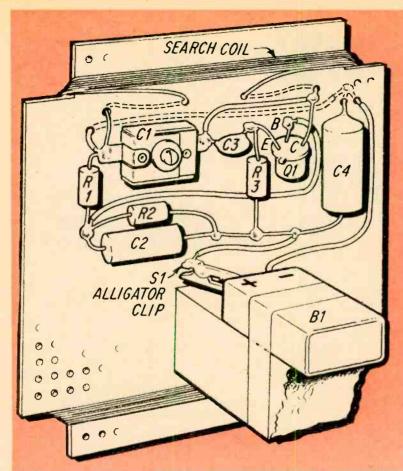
On our model, parts are held on board by weaving wires through holes. However, you could use flea clips. To turn on locator, we simply attach an alligator clip to positive battery terminai. Switch Sl. shown on schematic, would be connected between lead going to alligator clip and positive lug on Bl.
